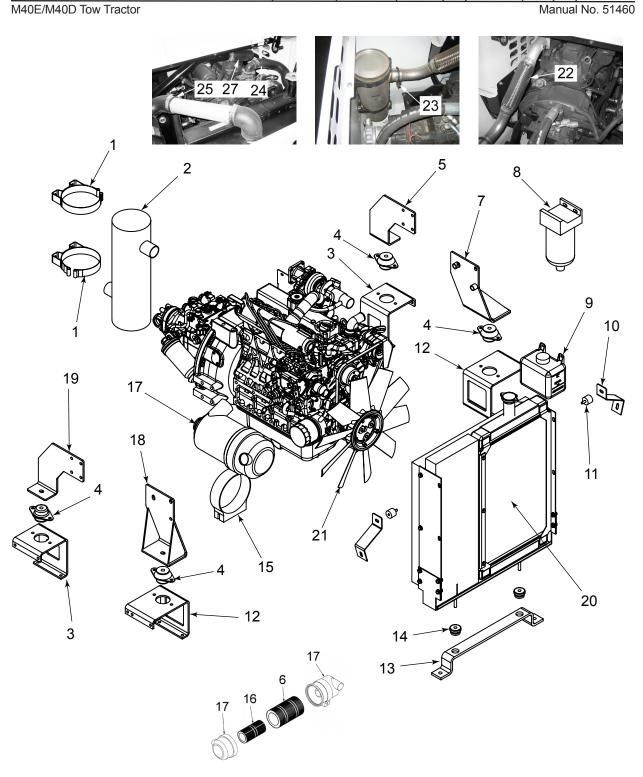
COOLING, MOUNTING, INTAKE, EXHAUST-KUBOTA V2403
